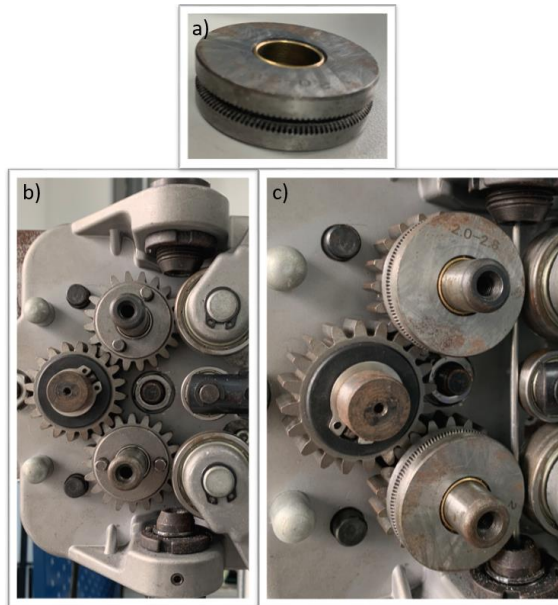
a) Gripping disk, b) Gear system, c) wire feeder assembly.
